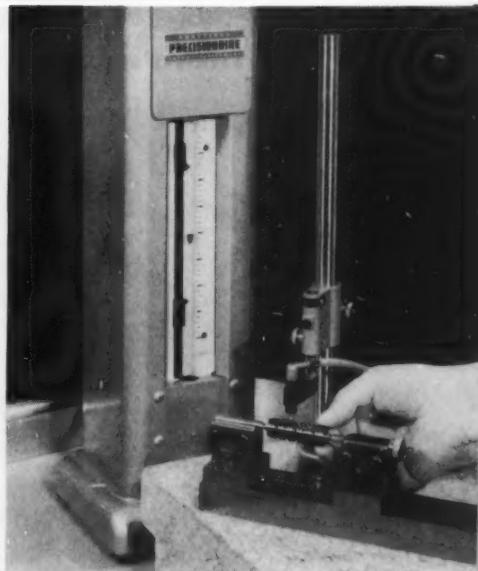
Extremely precise control must be maintained on the matching O.D. of the slider lands and the I.D. of the sleeve.
